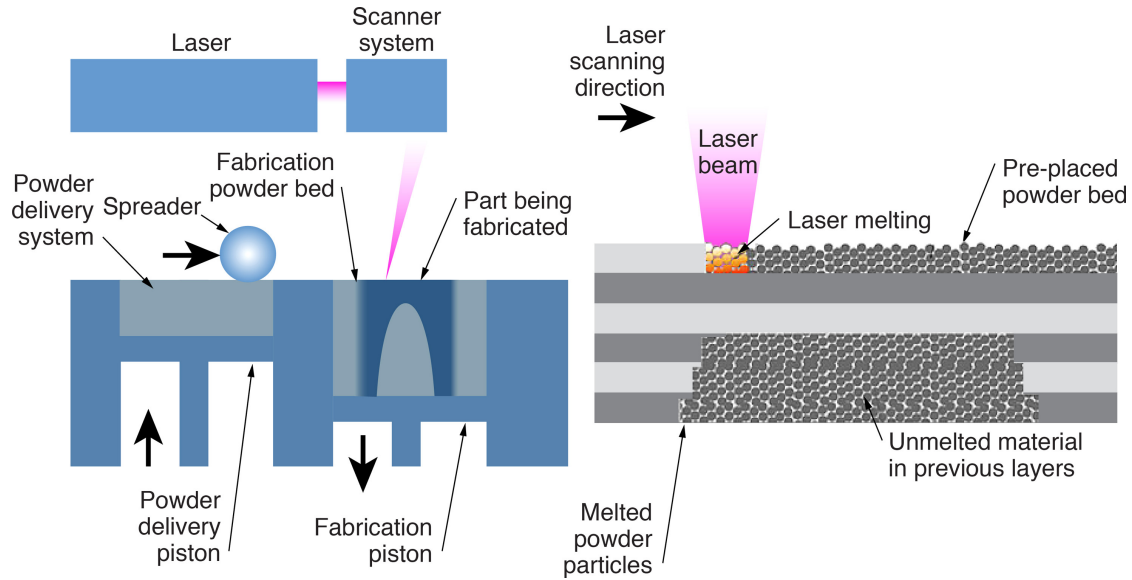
Working mechanism of Powder Bed Fusion [6].
